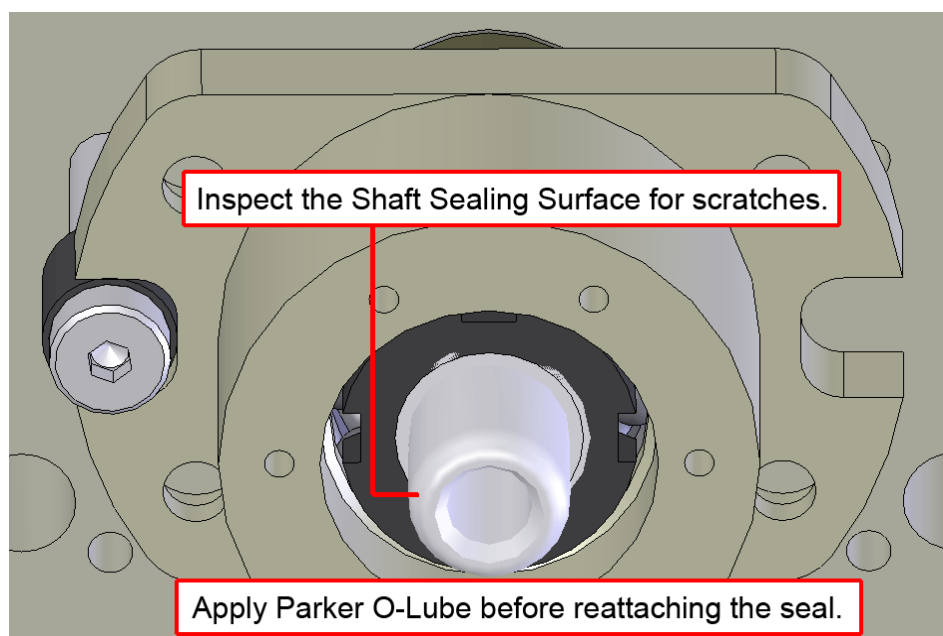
Wet Cut Rotary Union Shaft Inspection
